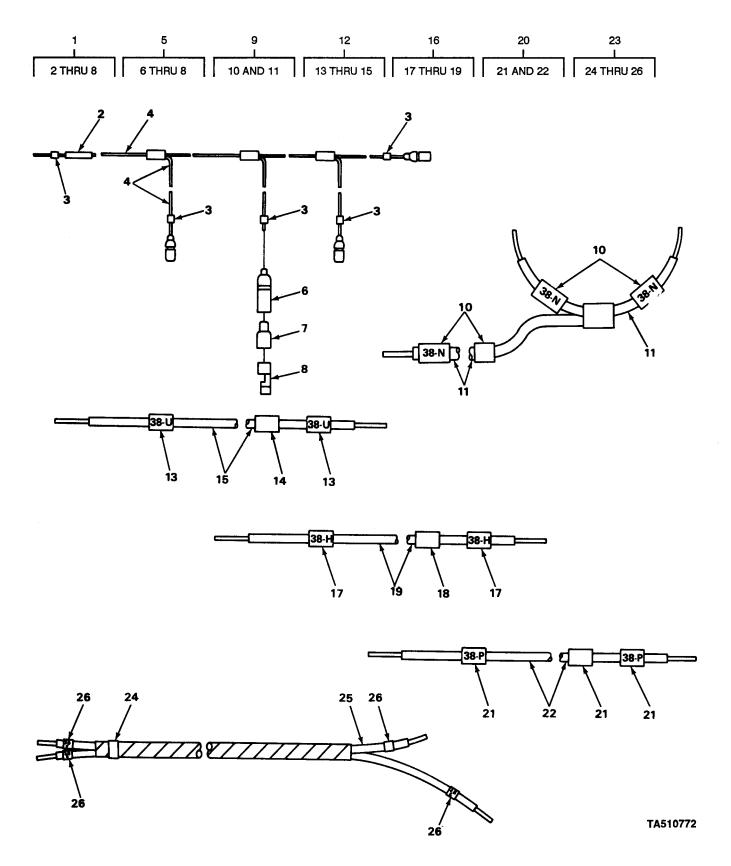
WIRING HARNESSES AND CABLE ASSEMBLIES.
